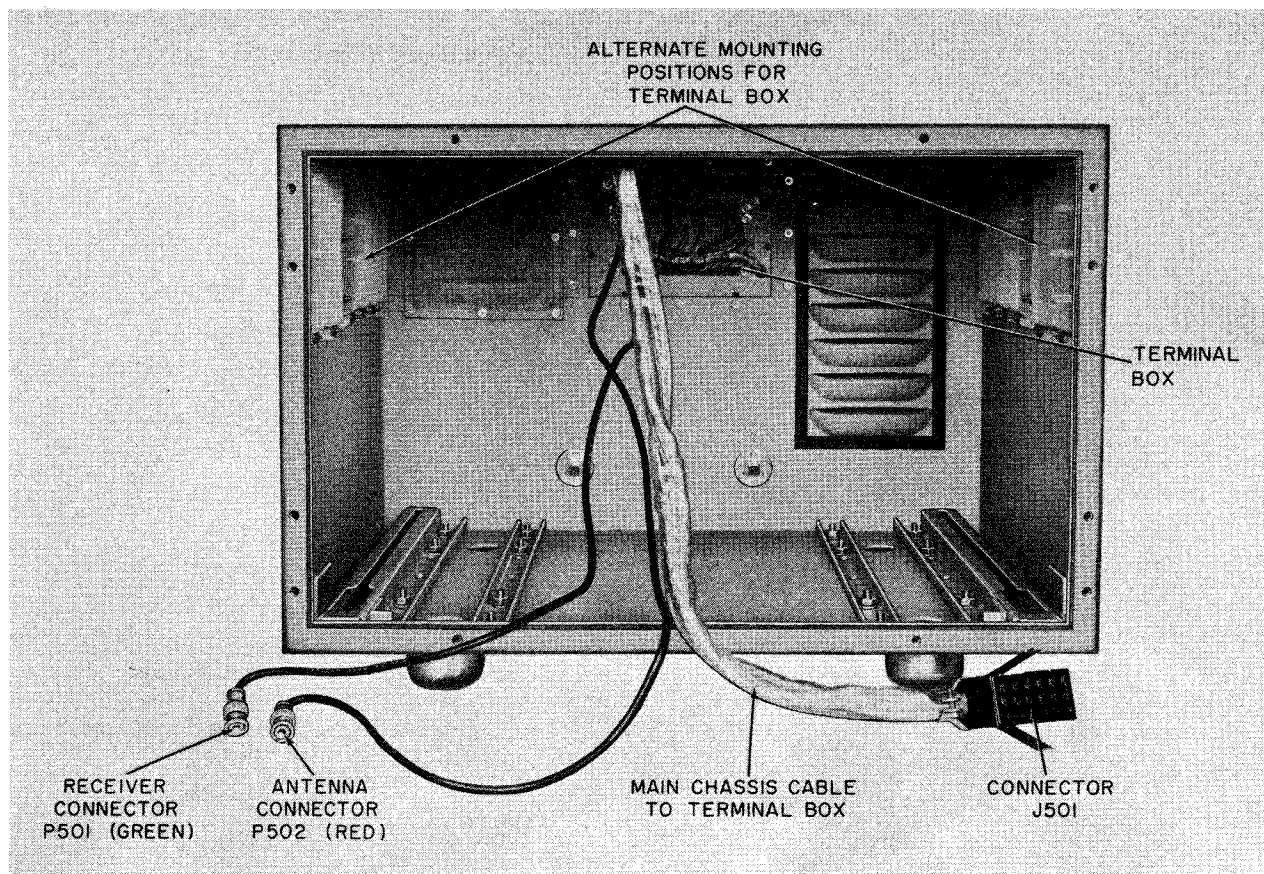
Electrical Equipment Cabinet CY-1126A/URT, Main Chassis Removed
